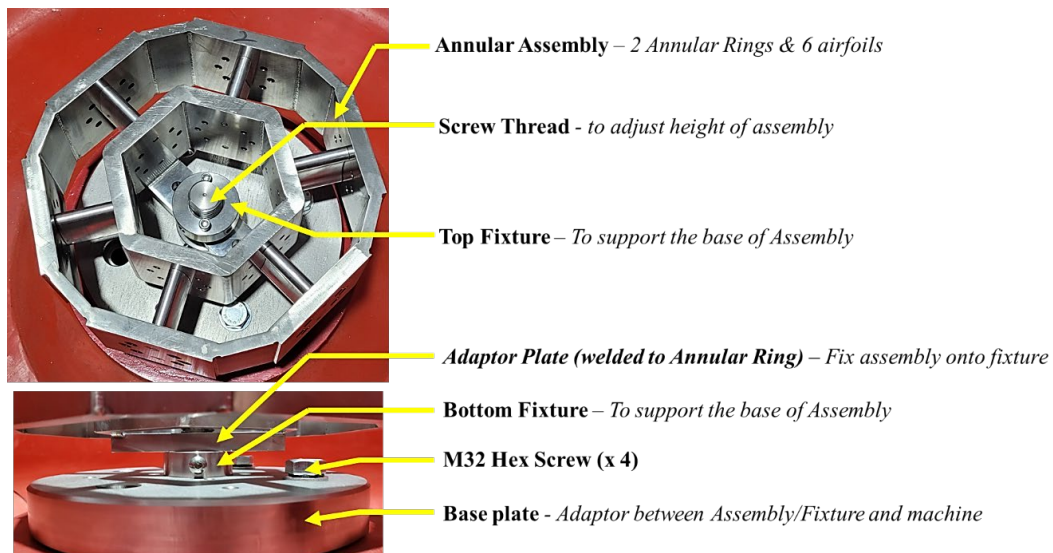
Fixture setup of the annular assembly onto the domeless bowl
